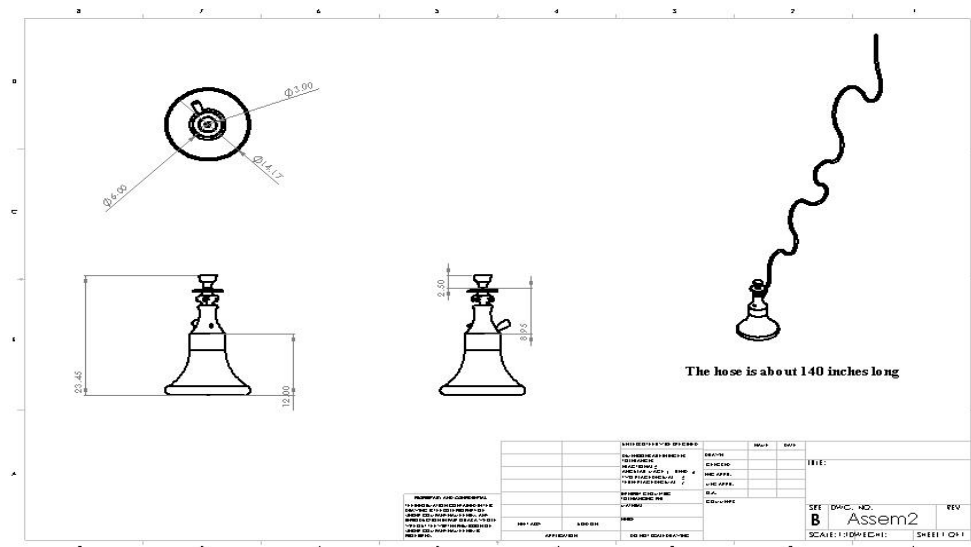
a drawing of the hookah with front, top, right and isometric views, the hookah hose is about 140 inches long.
